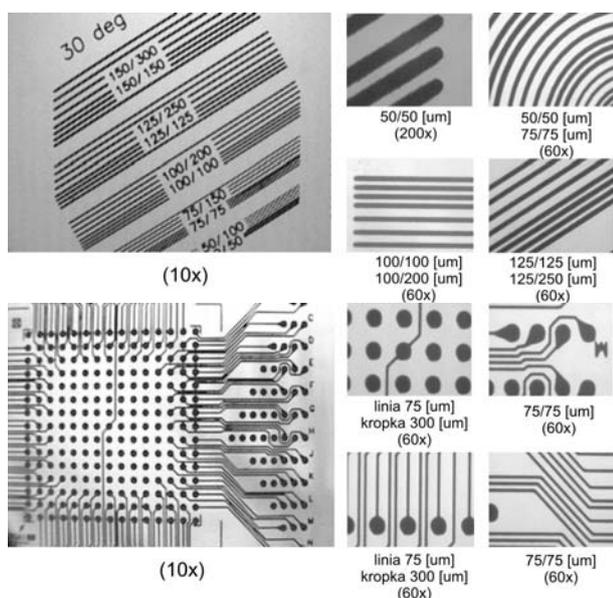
"Lines" and "BGA" patterns on PCB after etching process
